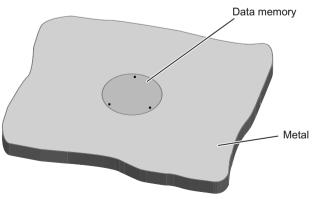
Flush-mounting of MDS D422 / D522 in metal without clearance
